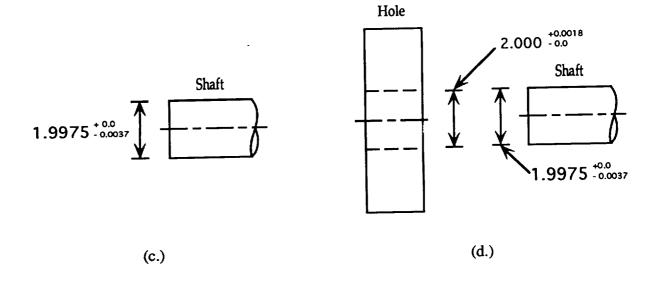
Example of the solution of fits for a hole and shaft assembly.
